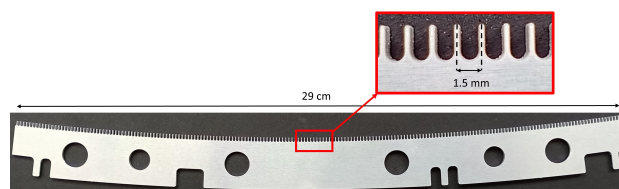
Photograph of an aluminium cathode blade used for D16 detector with a close-up view on the teeth machined along the blade.
